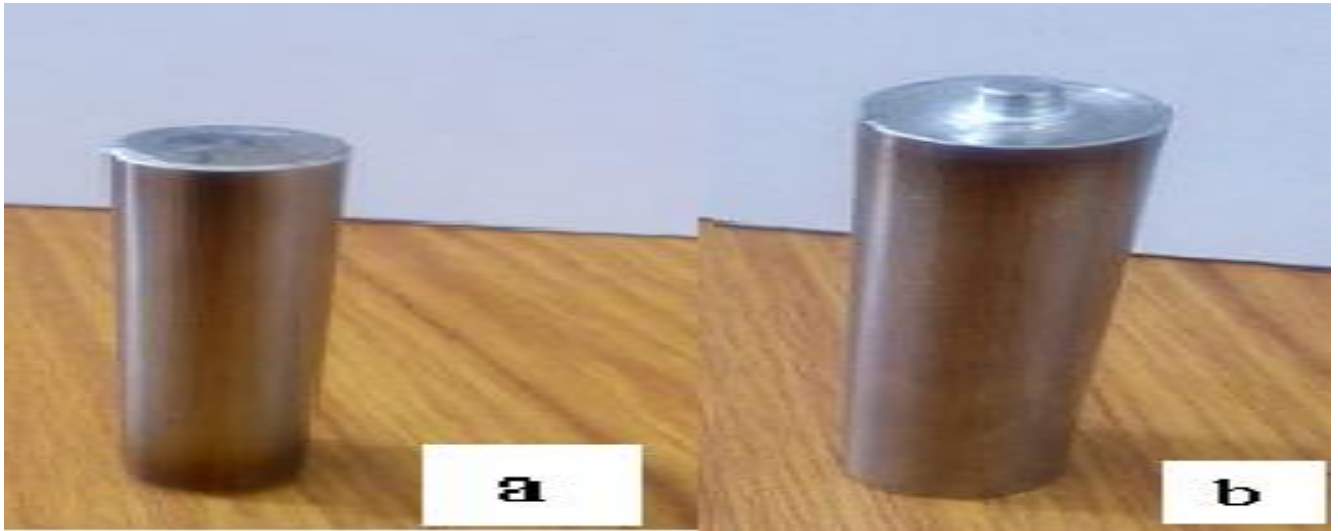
FSP tool (a) without pin/probe for preparing the specimens, (b) with square pin/probe for FSP.
